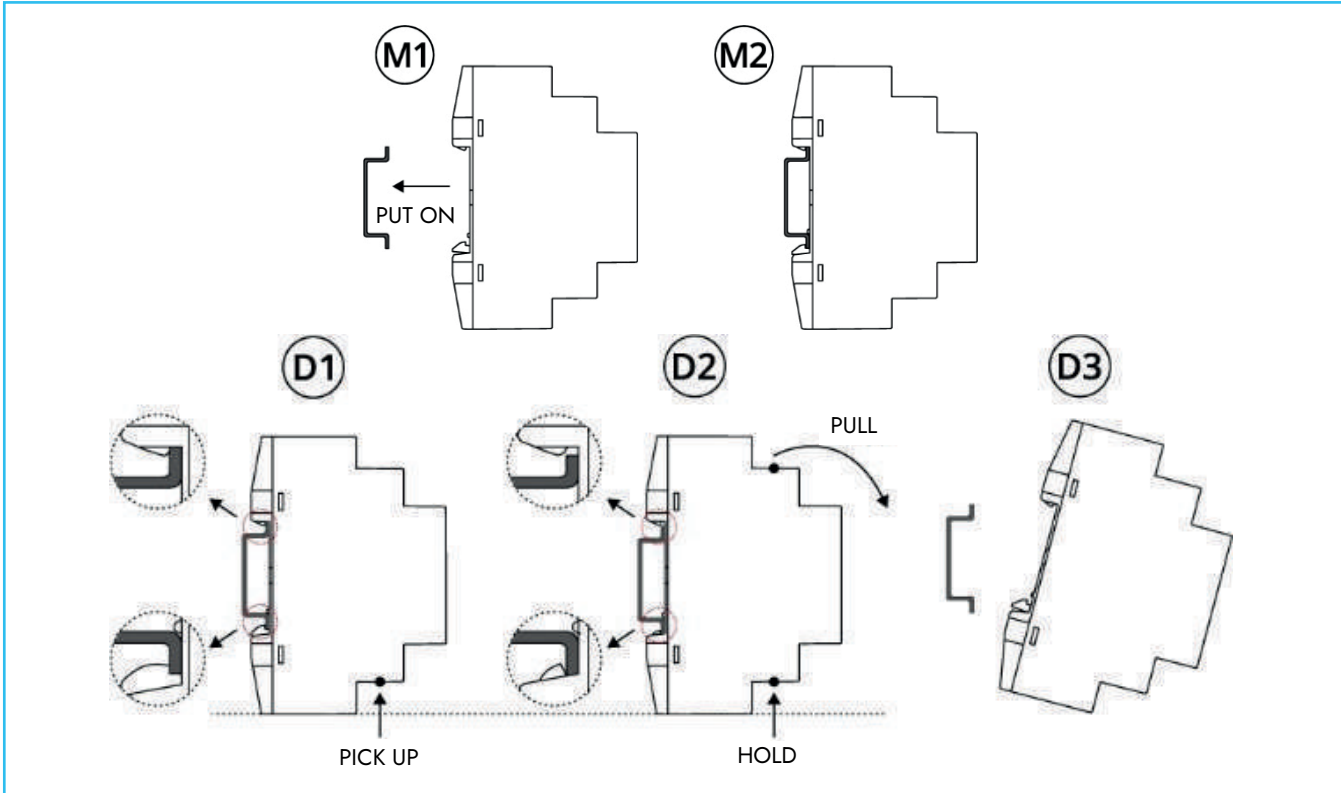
KAR01-KAR11 Toroidal Leakage Current Relay Product Assembly and Disassembly
